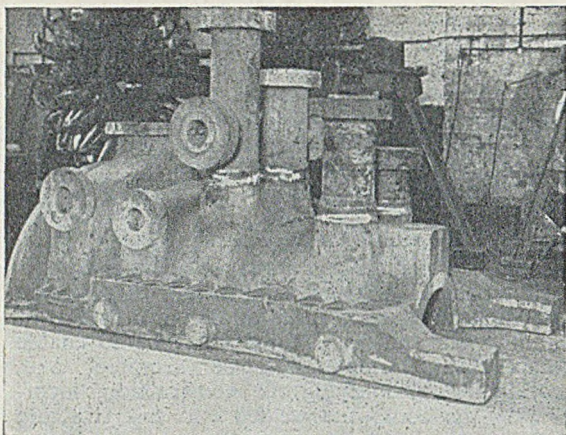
Parts of Composite Turbine Casting Welded in Position.
